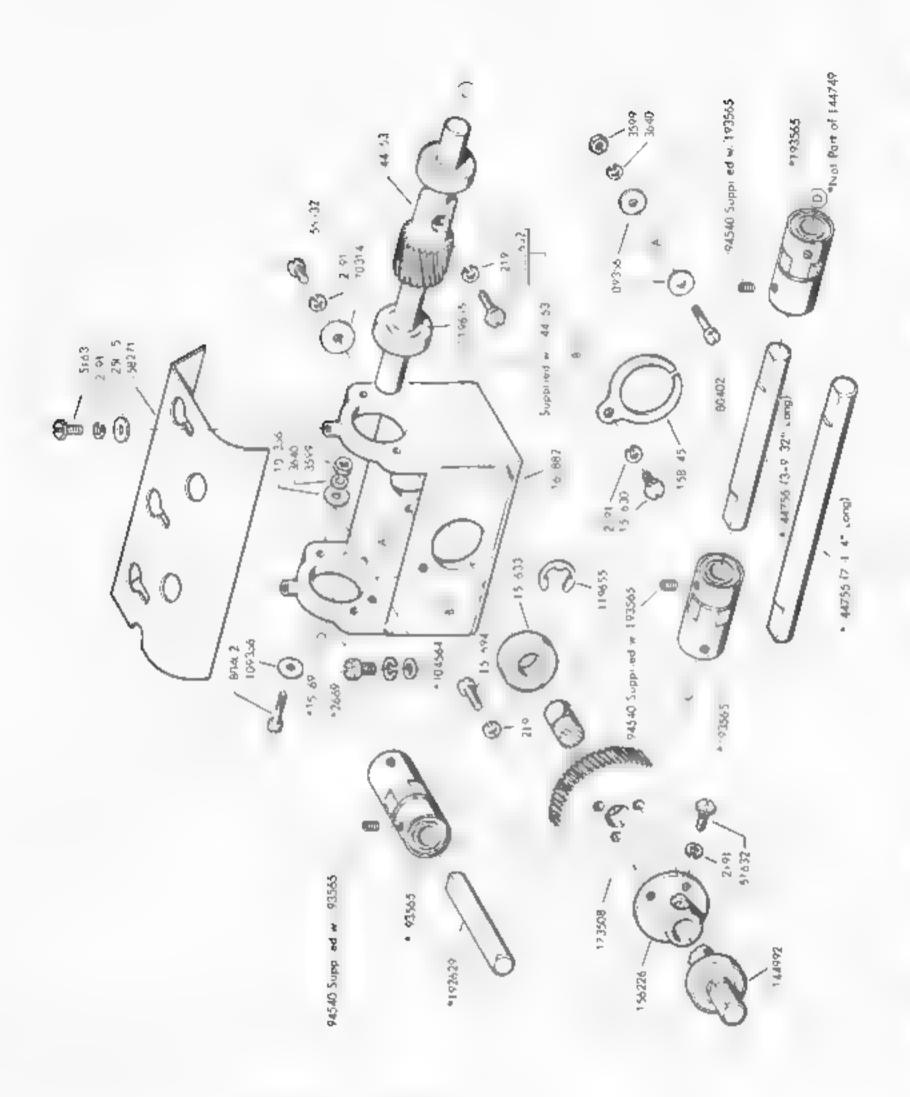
144749 BEARING BRACKET ASSEMBLY
